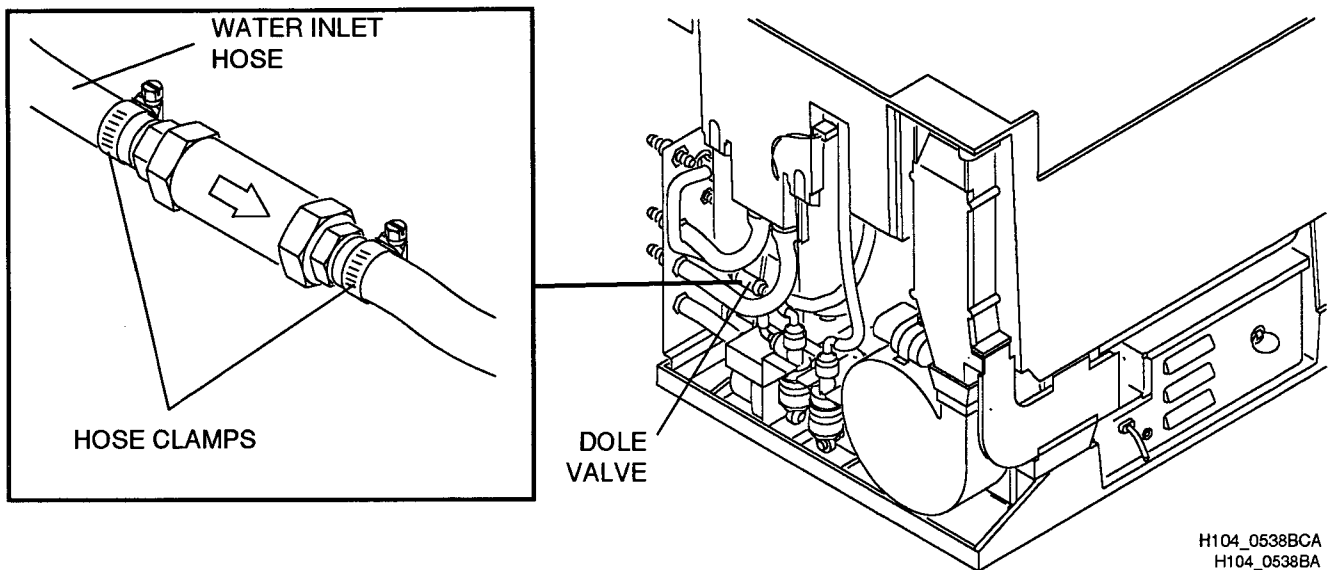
Identifying Parts on the 270 RA PROCESSOR or MULTILOADER 300
